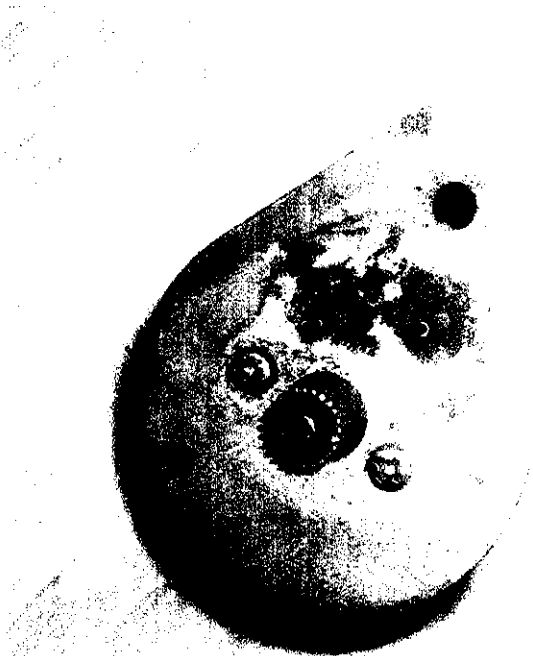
FRONT VIEW OF DC MOTOR
